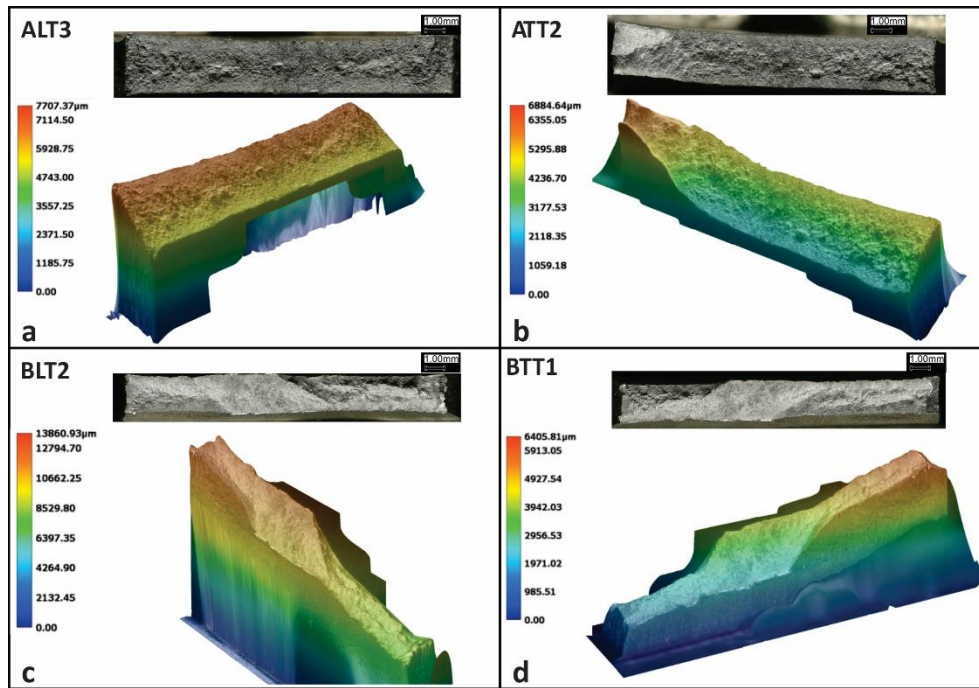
Fracture surface of the tensile testing - macro-optical picture and 3D Topography: a) Specimen ALT3; b) Specimen ATT2; c) Specimen BLT2; d) Specimen BTT1.
